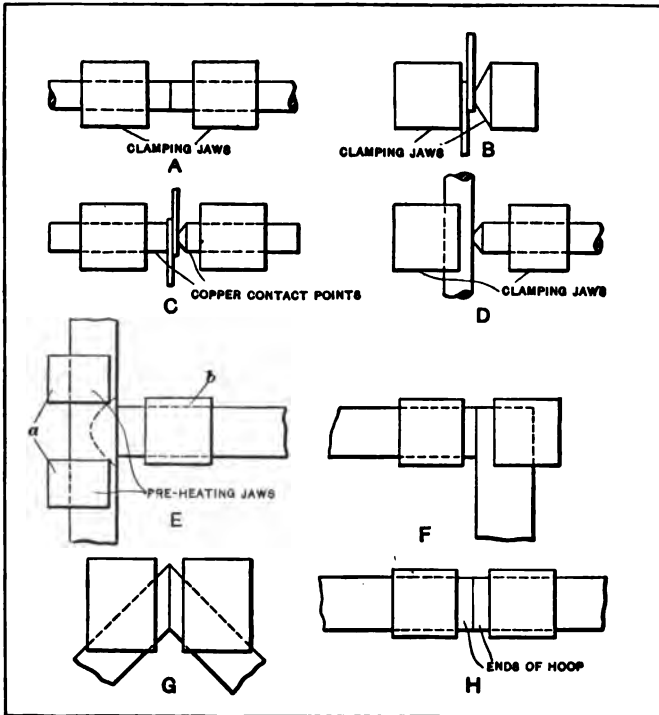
Diagram illustrating Arrangement of Clamping Jaws for Performing Various Types of Welds
